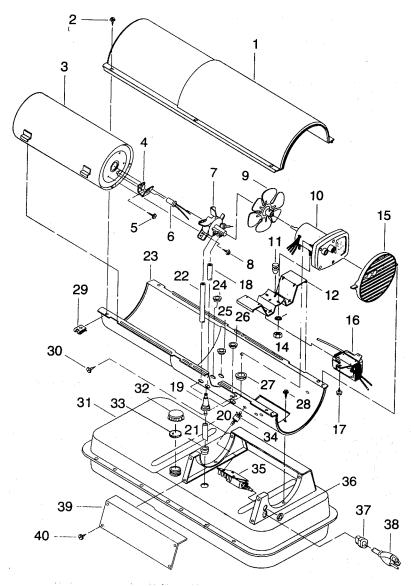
Replacement Parts Illustration for Heater Model F110E
